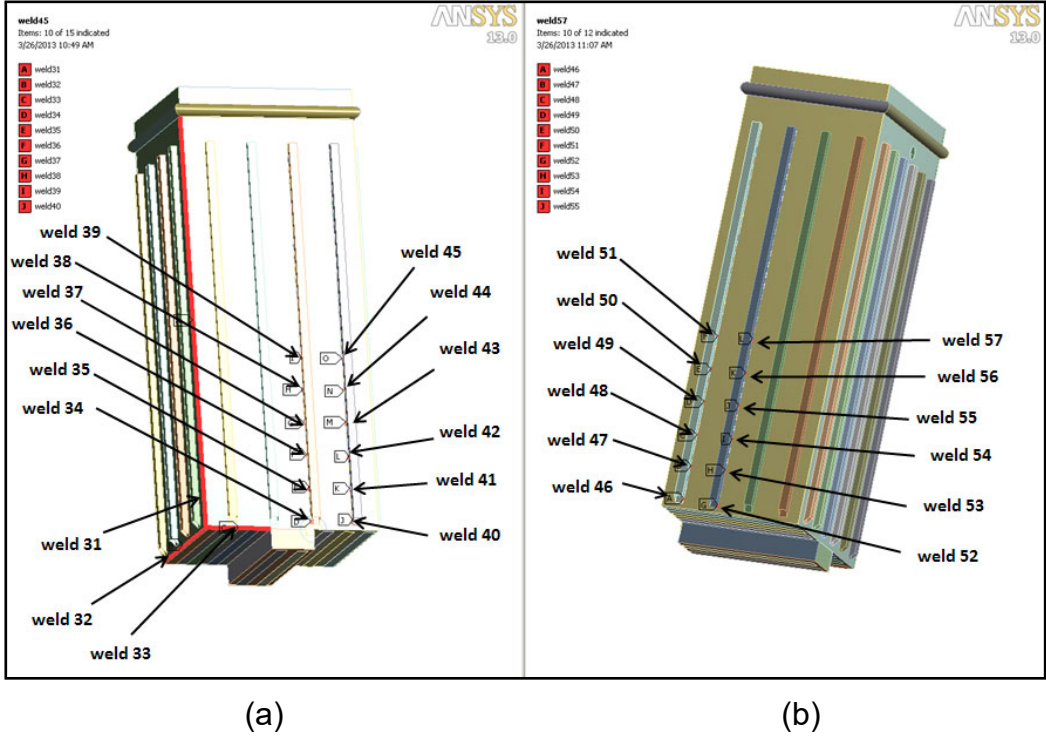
Case 3 Weld locations for the original outer tank design
